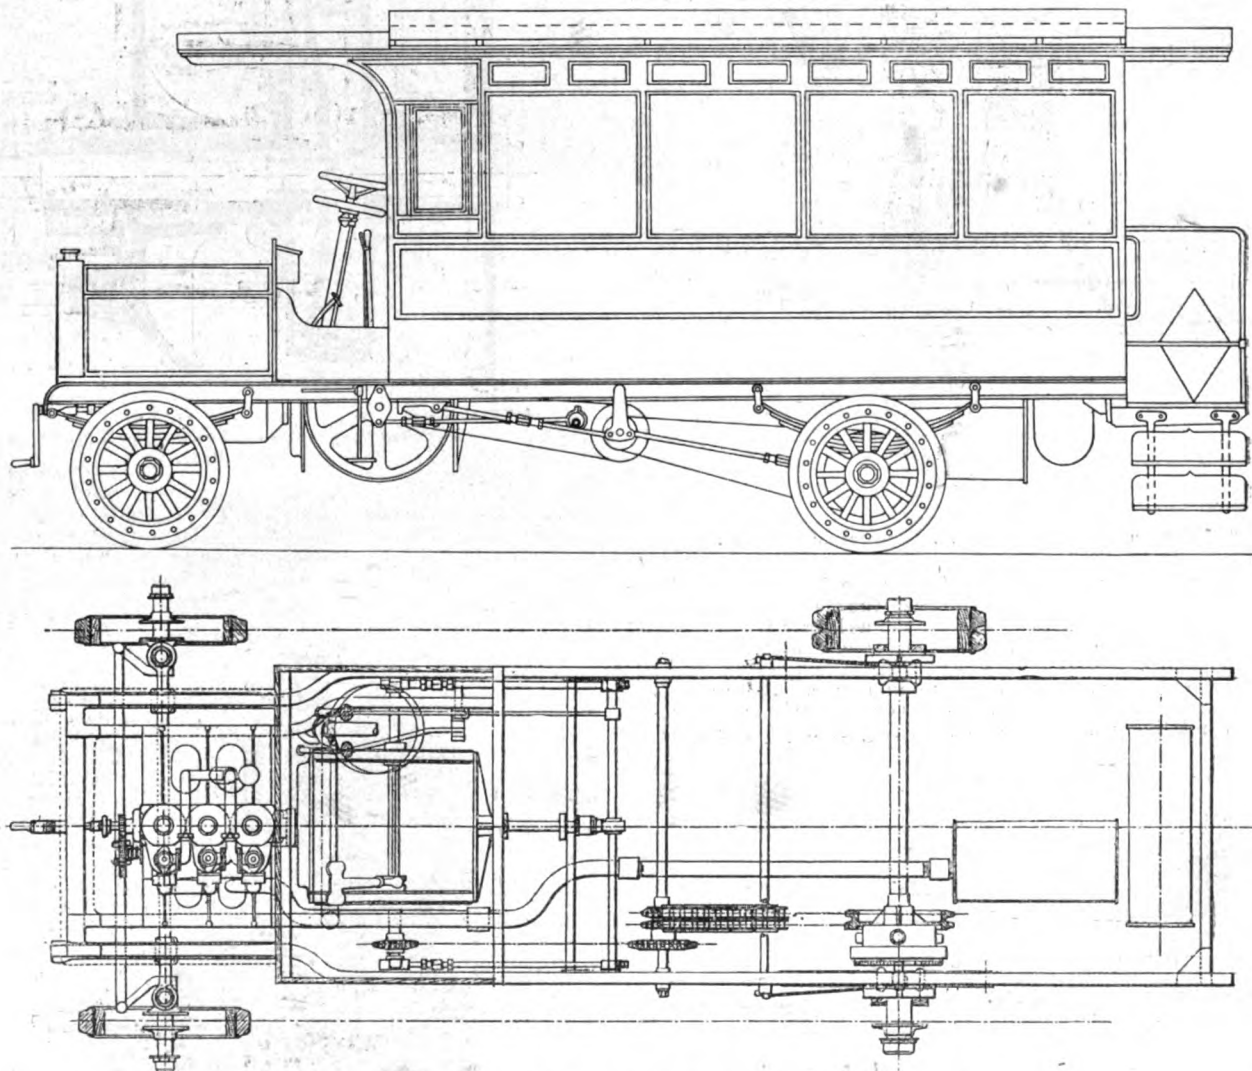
and 29.—Elevation and Plan of Frick Single-Deck Friction-driven 'Bus.
